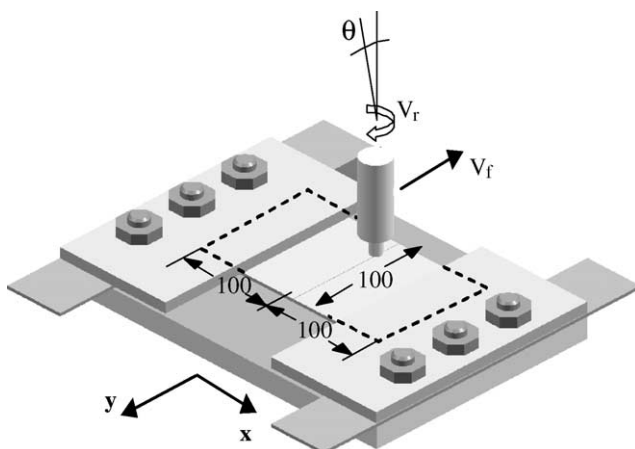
Sketch of a FSW butt joint during welding processing.
